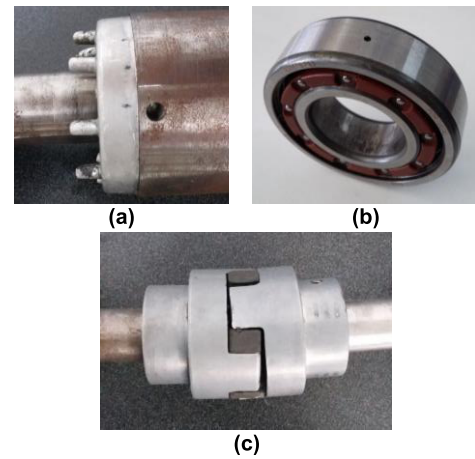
Proposed study cases for infrared imaging-based fault analysis: a) Broken rotor bar (BRB), produced by drilling the rotor 8 mm, b) Ball bearing defect (BD), produced by drilling a 2 mm hole, and c) Misalignment (MAL), producing by moving the free end of the induction motor.
